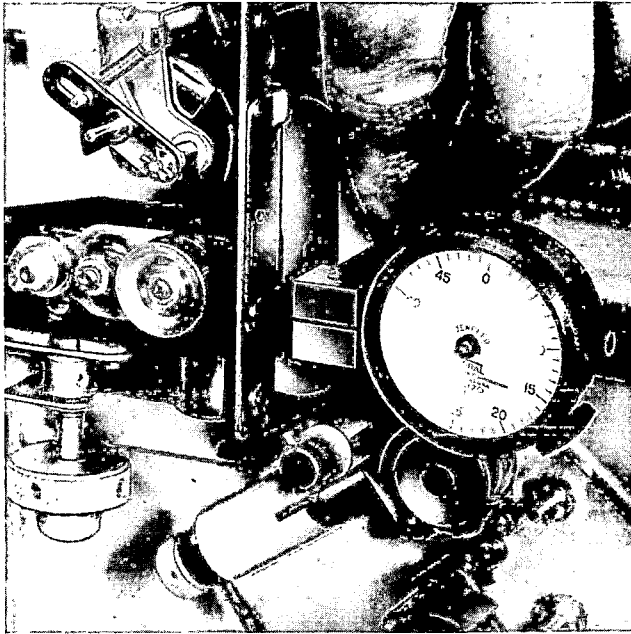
Checking Shuttle Tooth Protrusion with Indicator Gage
